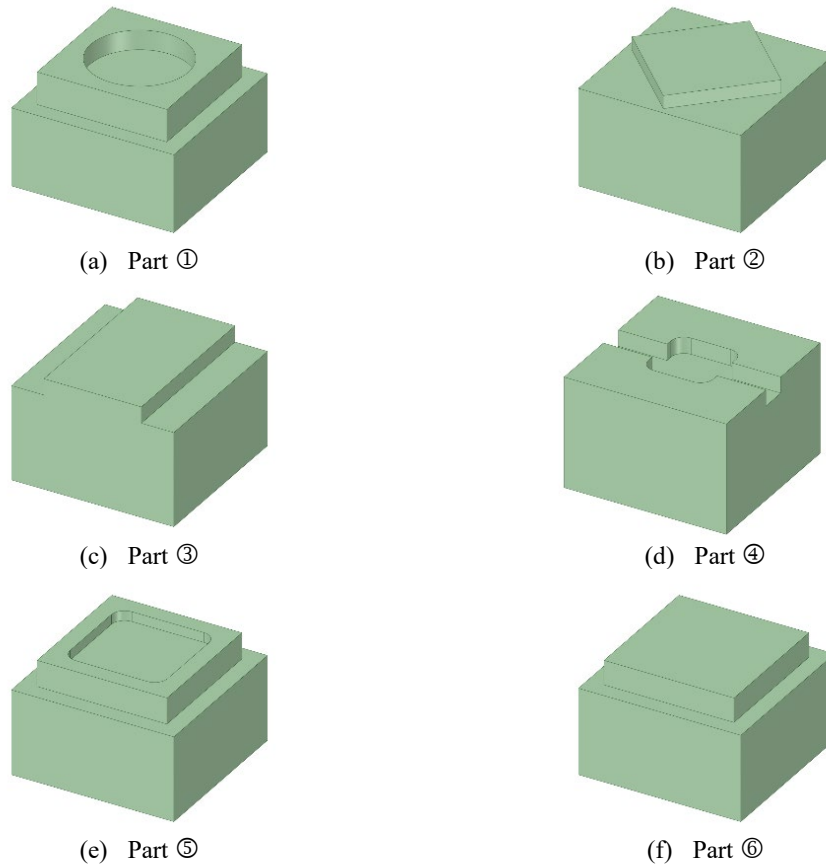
Parts to be machined in the experiment shown in Section 3.2.
